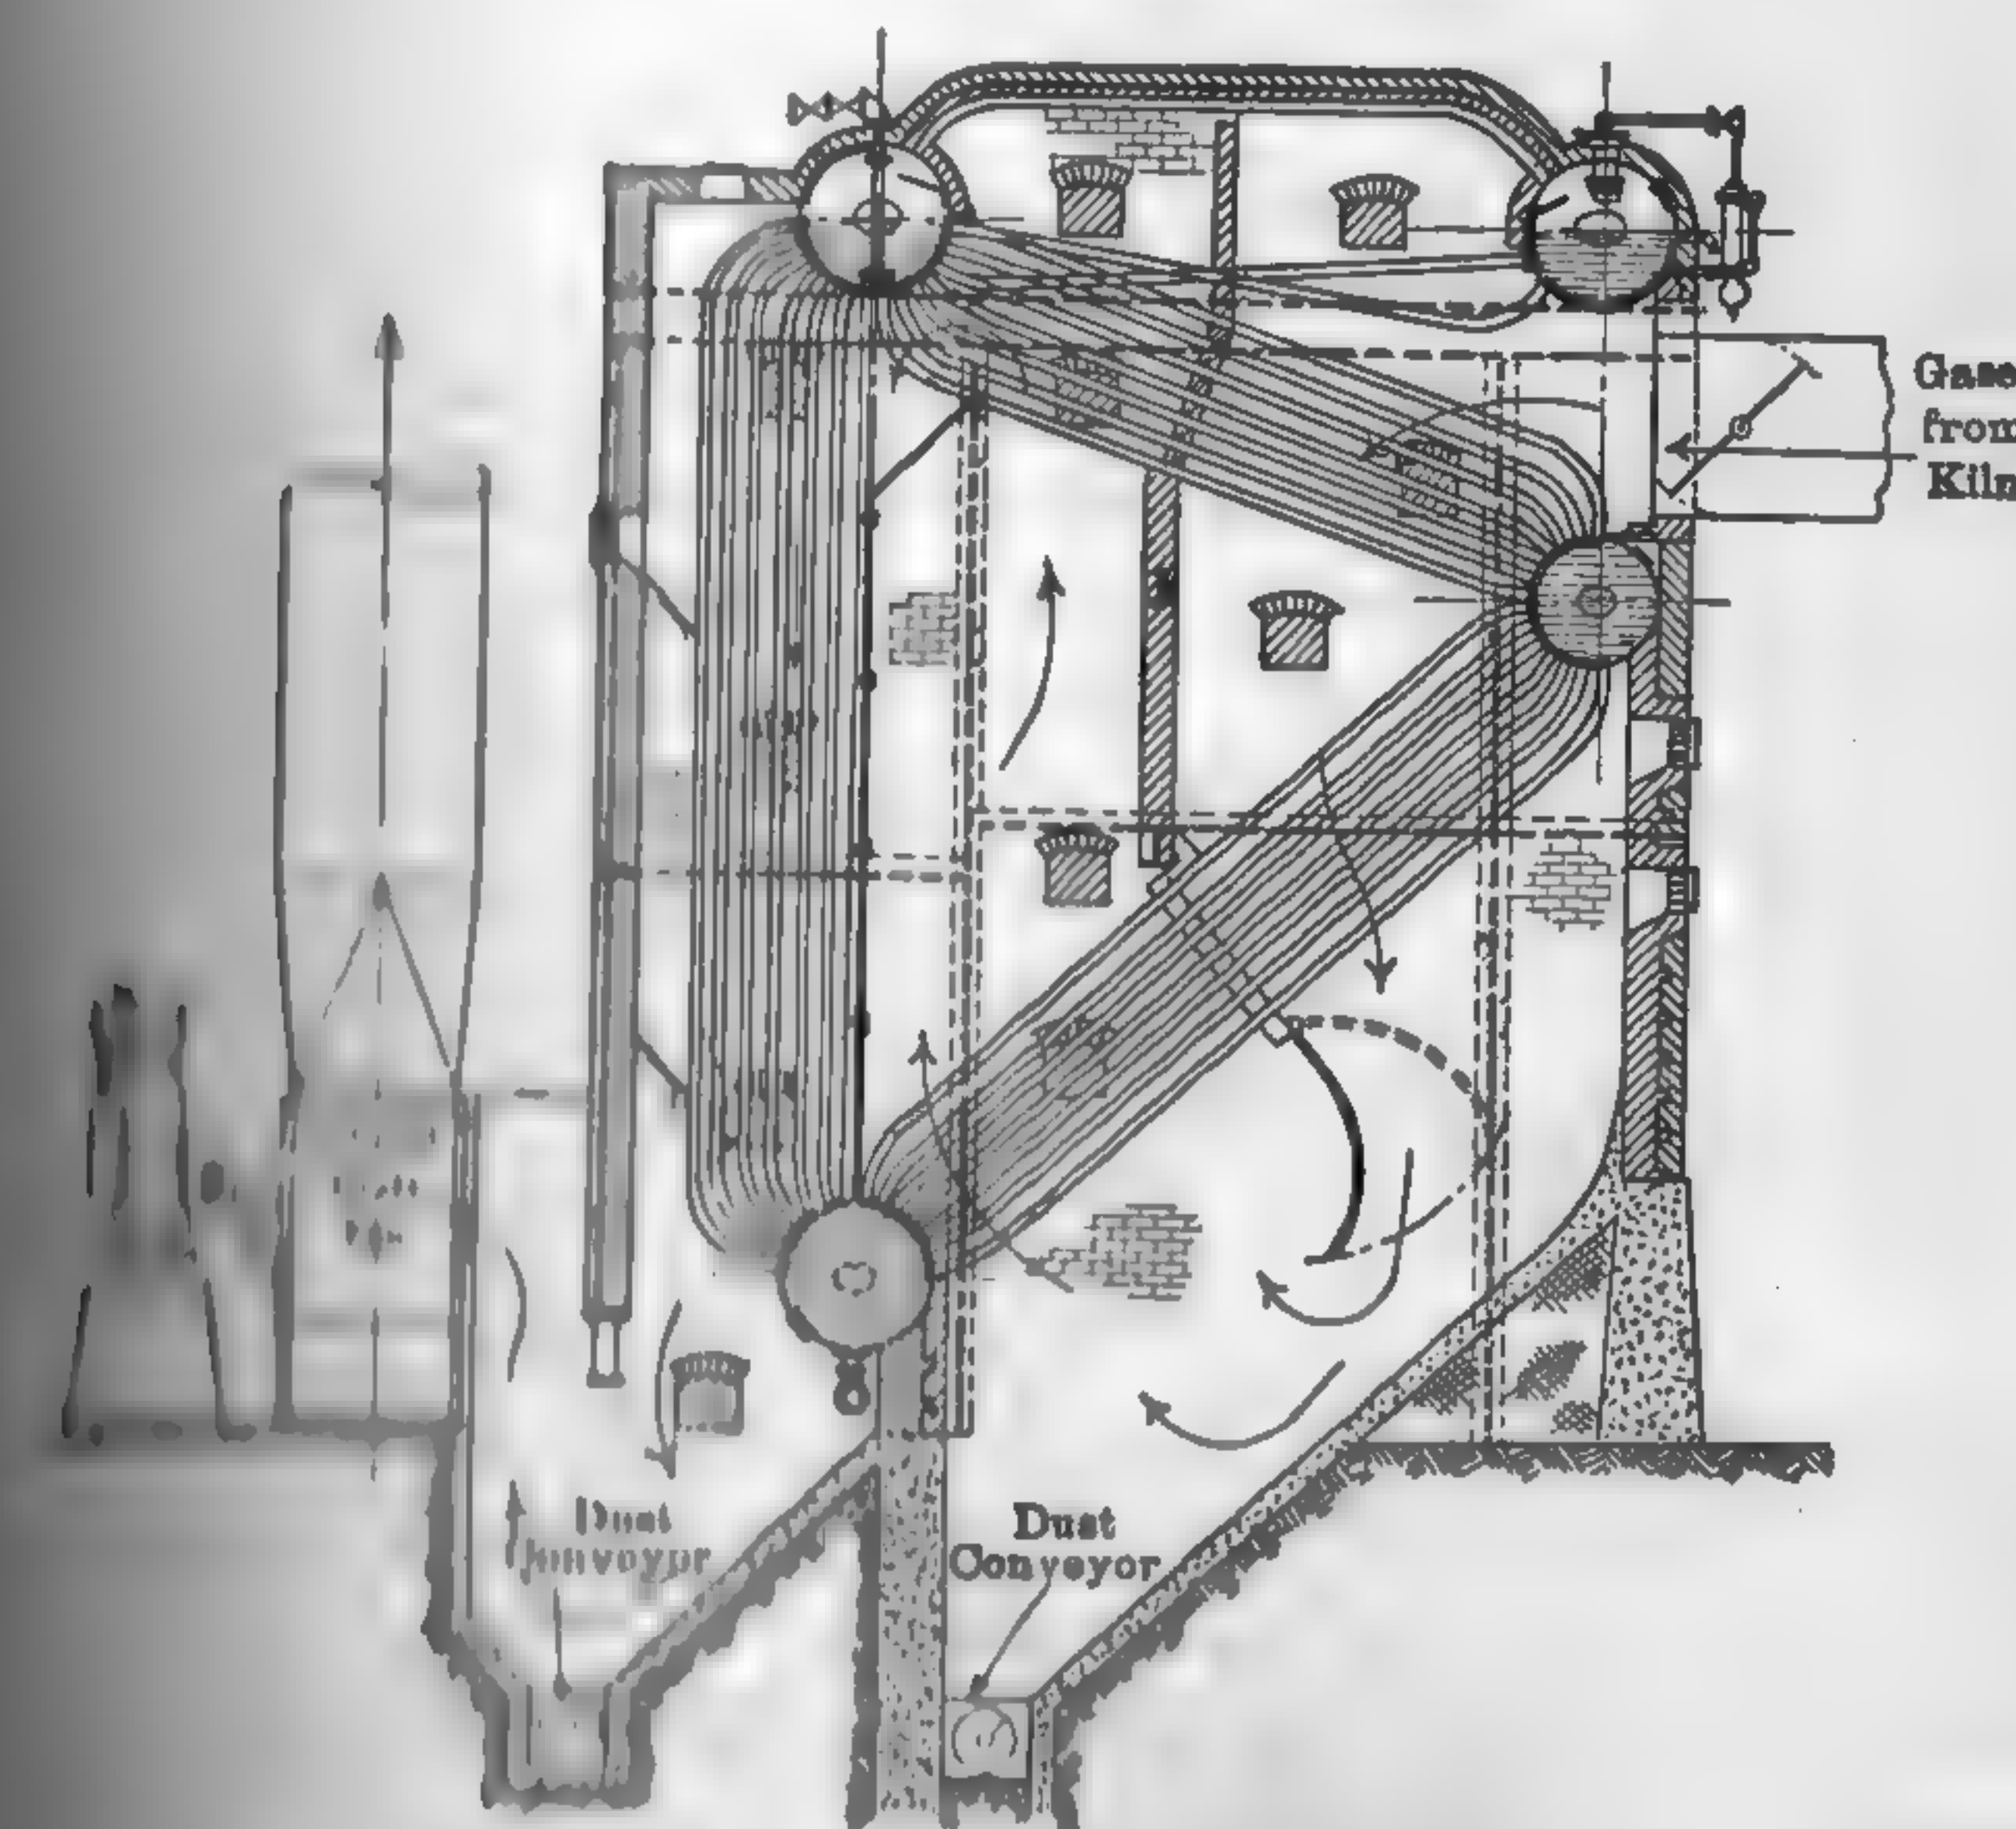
Induced Draft for Waste-heat Boiler Equipment.
